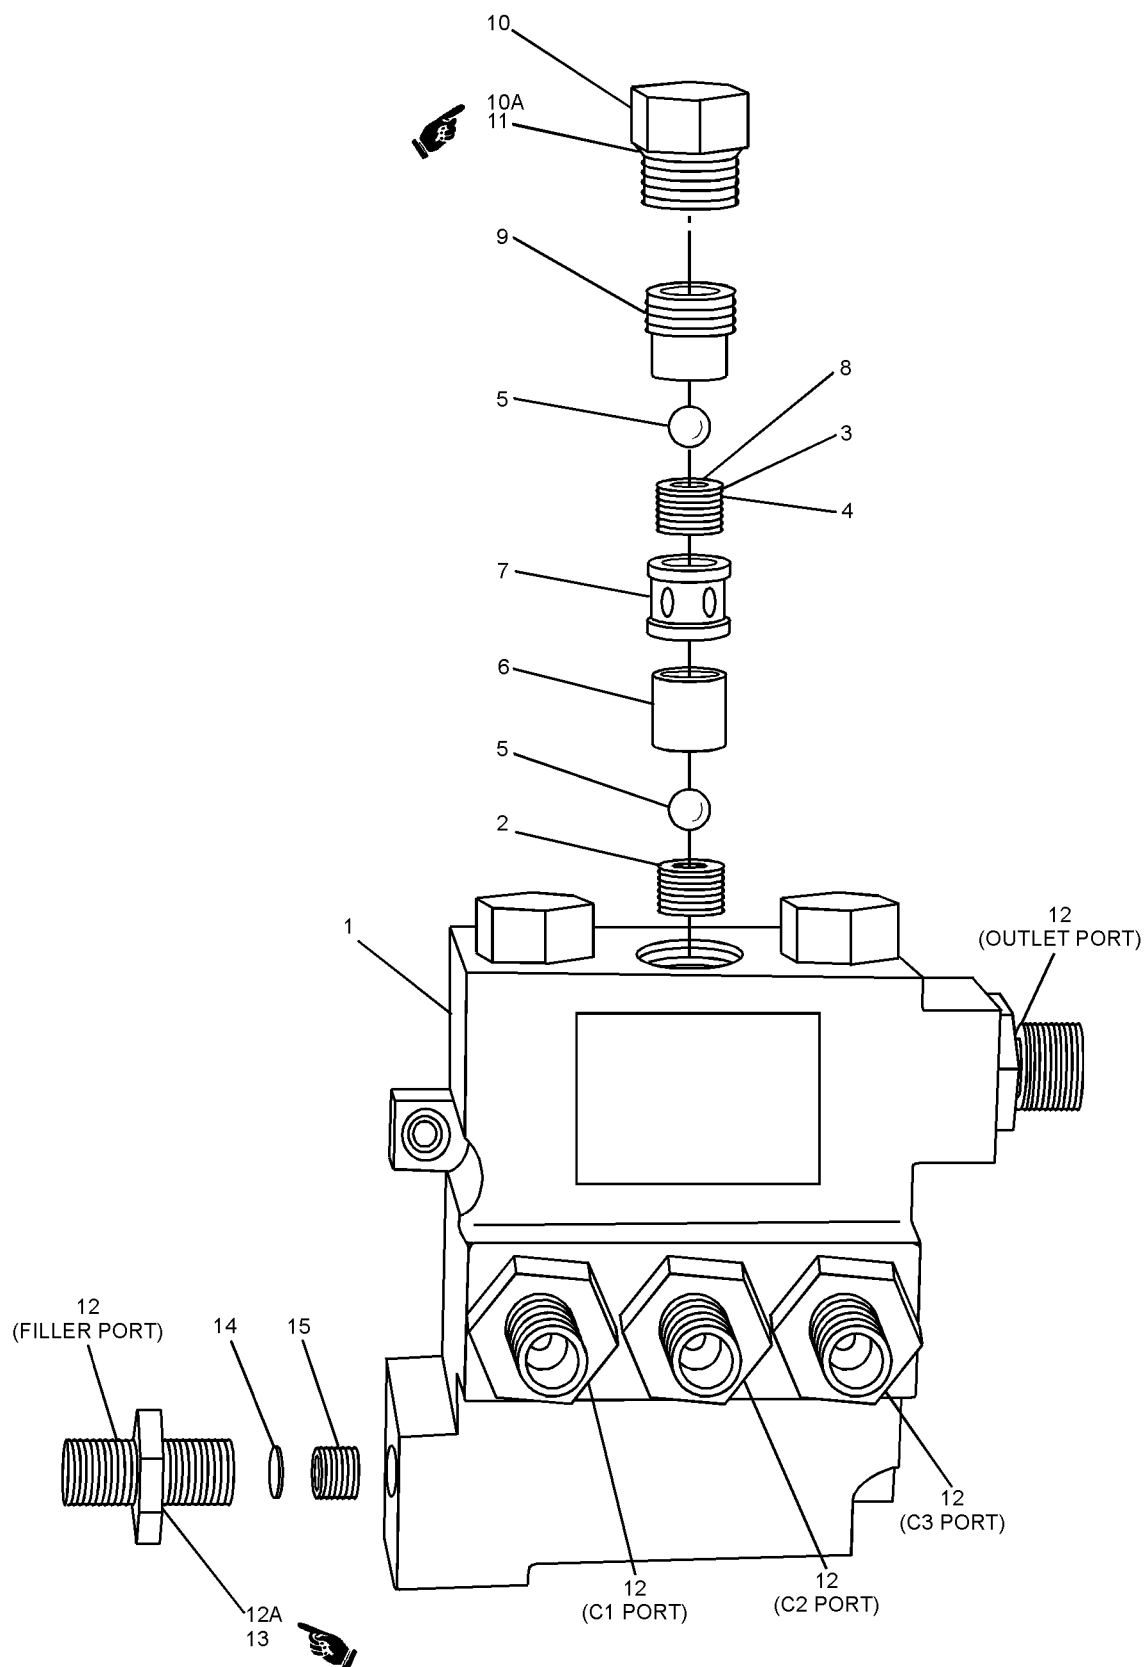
High Pressure Oxygen Manifold and Check Valve Assembly
